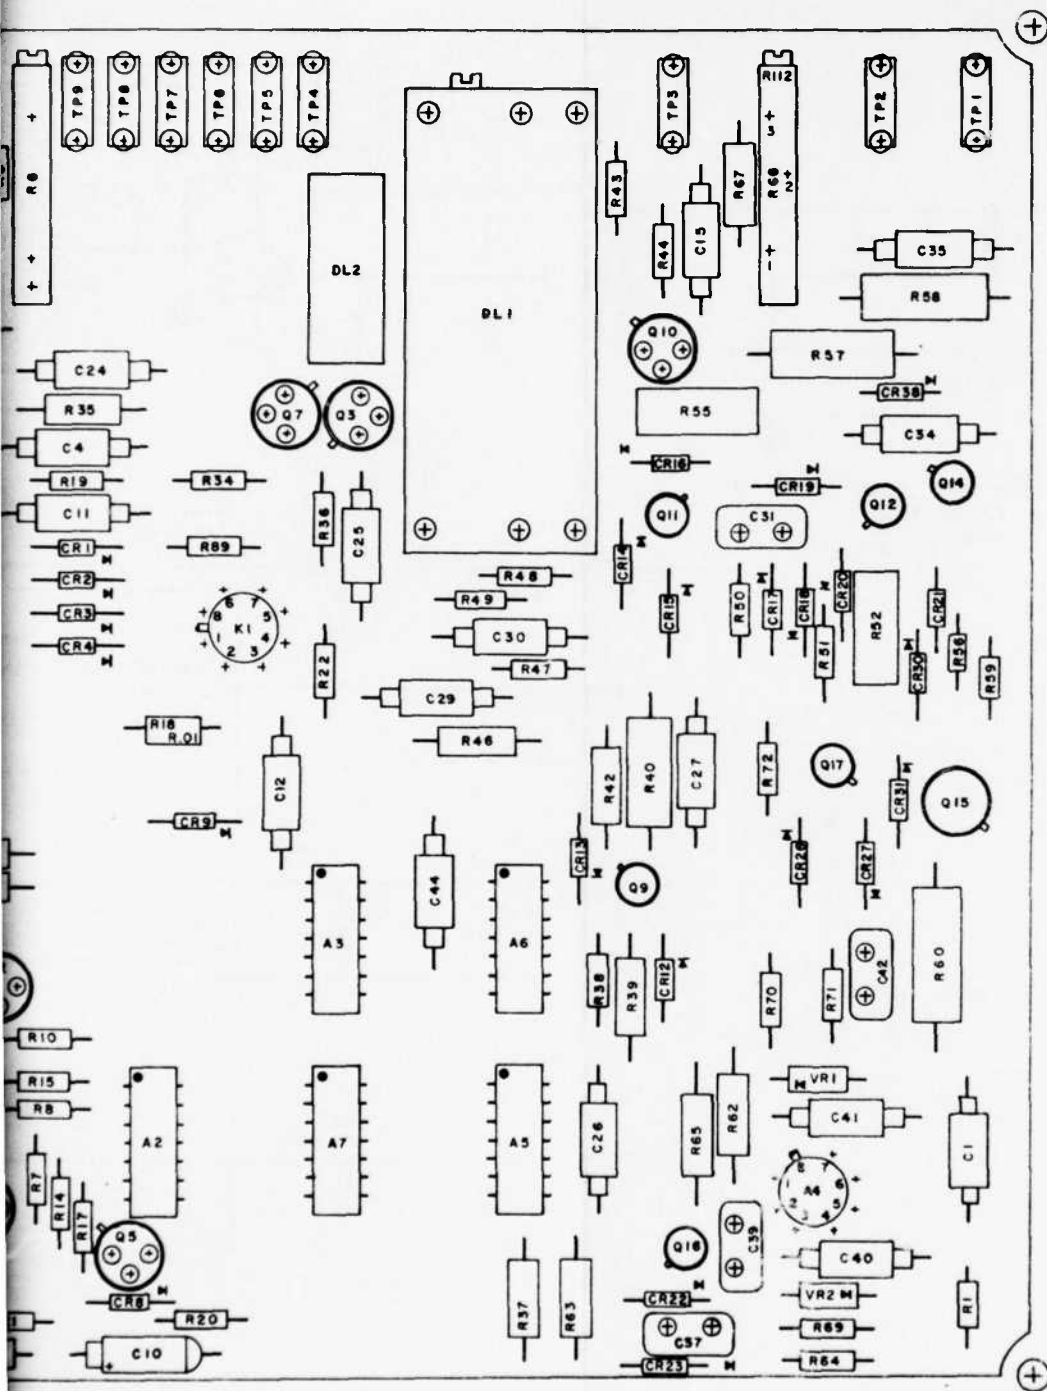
MODIFIED A5 PCB — SWITCH PVD
